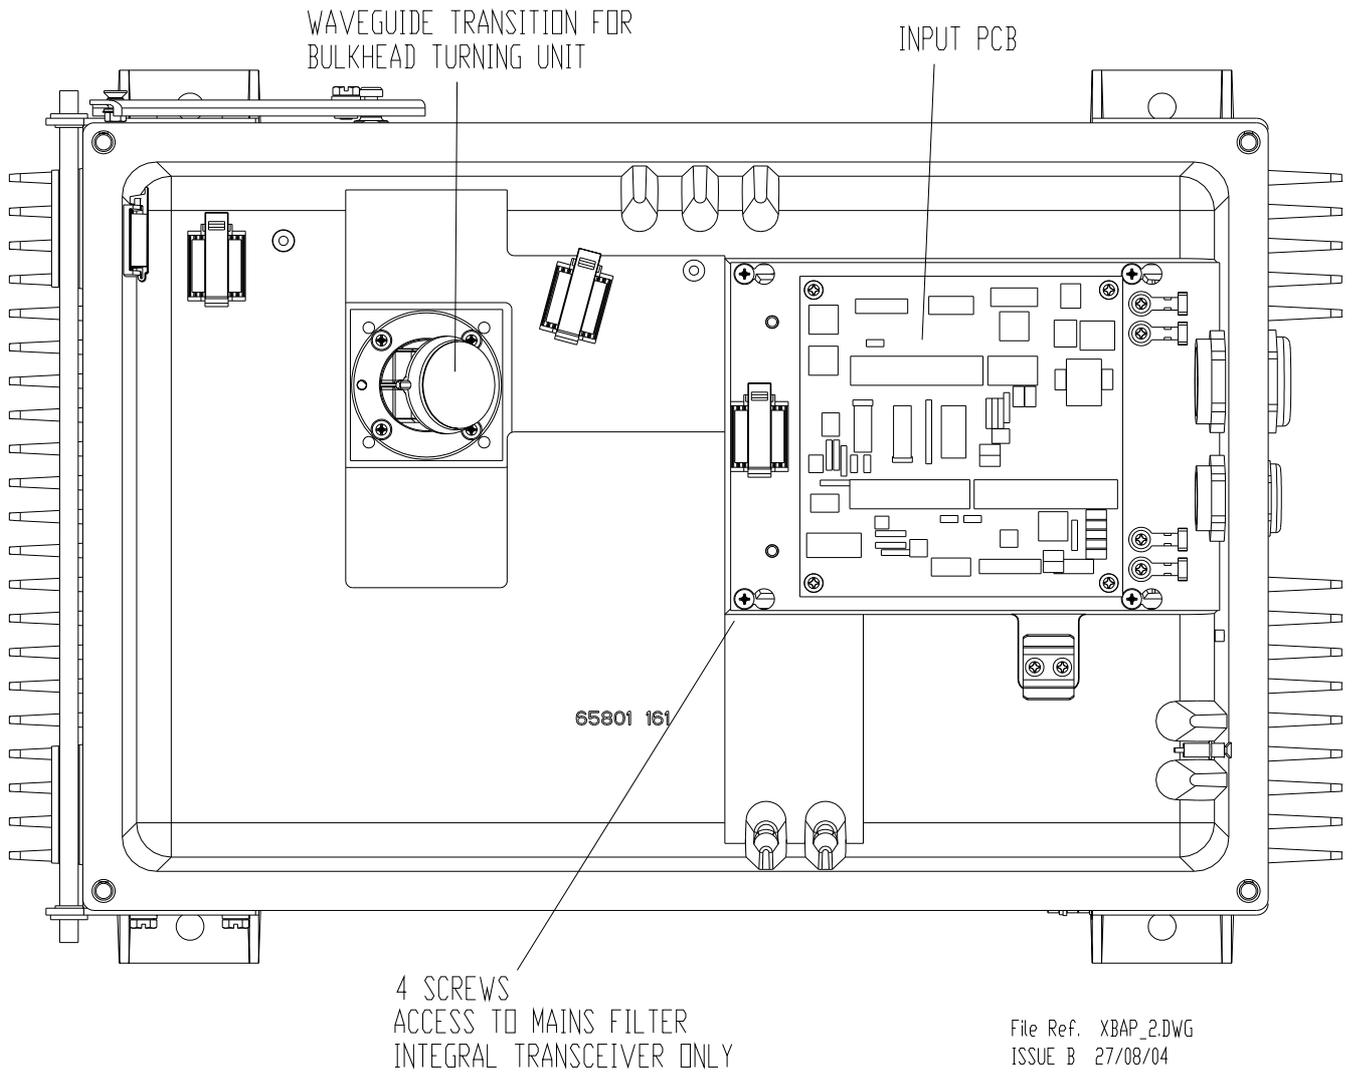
X-Band Bulkhead Turning Unit – View showing assemblies fitted to lower casting
